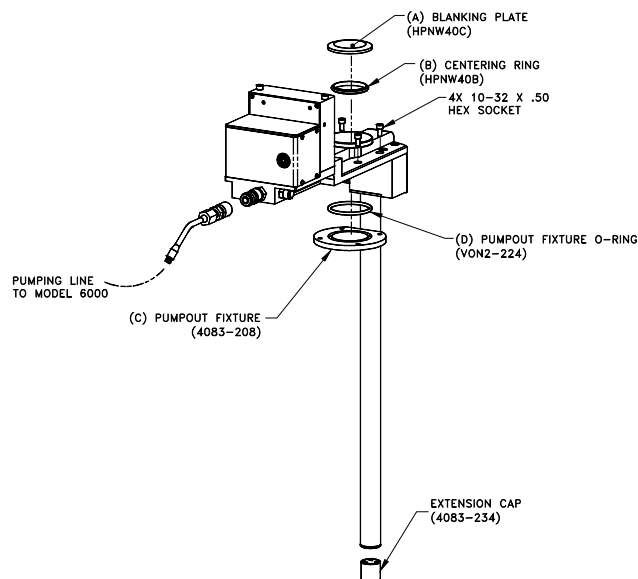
Exploded view of pumpout fixture and blanking plate (HPNW40C). Note the extension cap for the cryopump pumping tube, which is used only with the EverCool option (see Section 2.2.9)
